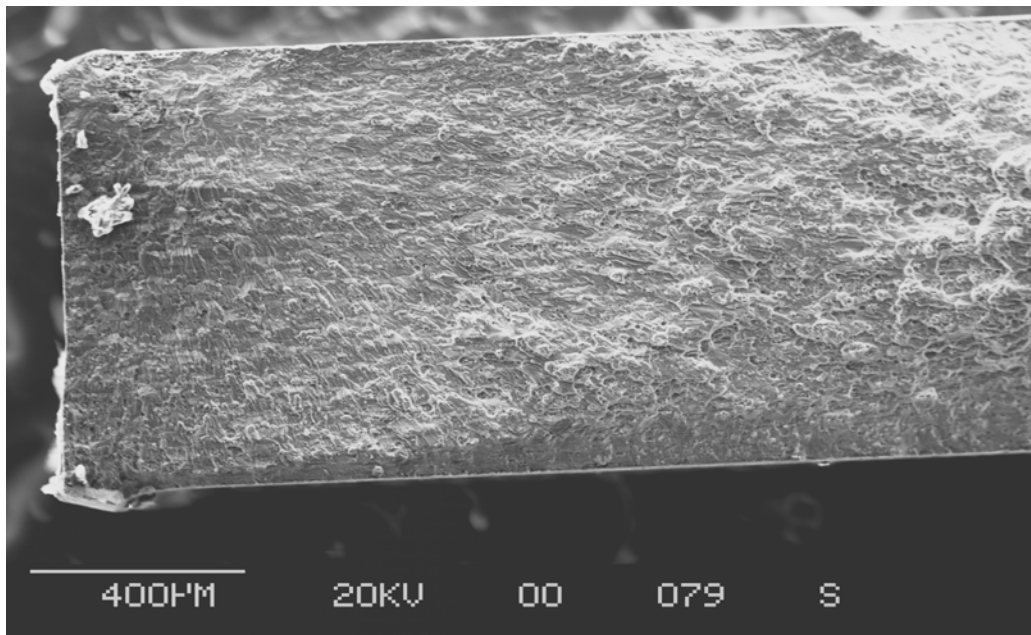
Fatigue Crack on Fracture Surface of Specimen 5944.
